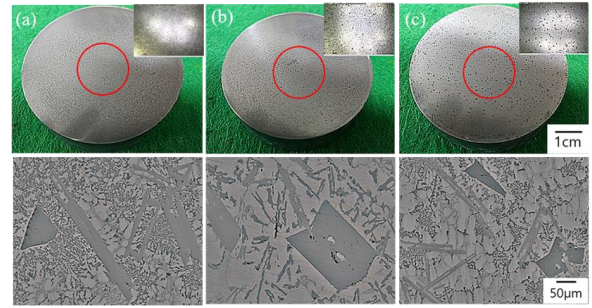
Micro- and Macrostructure of Al-17Si-3Fe by permanent mold casting (a) 300 °C pre-heated mold and water quenching (b) 25 °C mold and air cooling (c) 25 °C mold and water quenching
